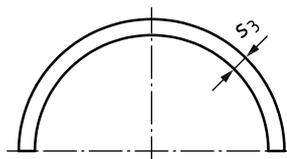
Wall thickness,  $s_3$ , of a half bearing
